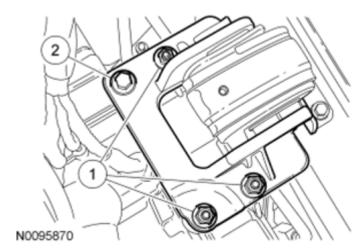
Locating Engine Mount Brace Nut And Bolt Courtesy of FORD MOTOR CO.
